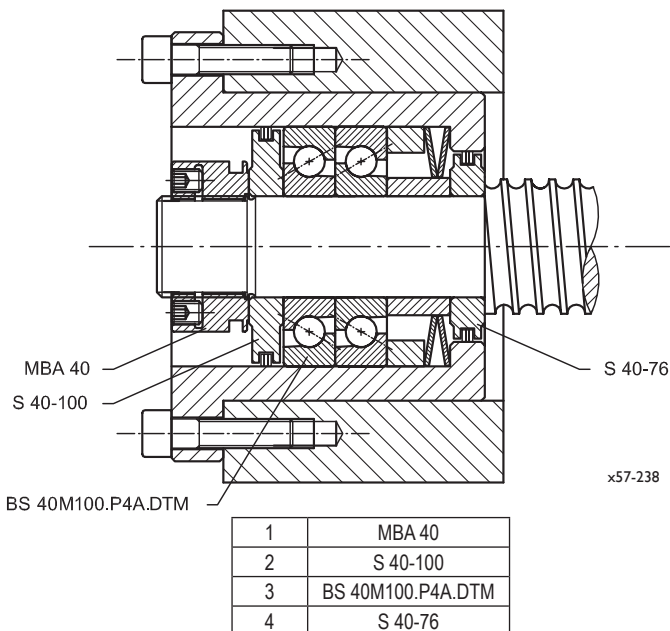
Sealing of a spring-preloaded floating bearing on a ball screw with two S series labyrinth seals
